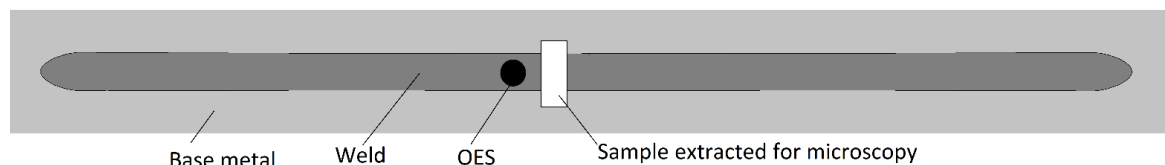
Top view of weld that shows the location of OES measurement relative to that of the sample extracted for microscopy. The reported chemical composition of each weld was obtained from this OES measurement. The total length of a weld bead was typically 450 mm.
